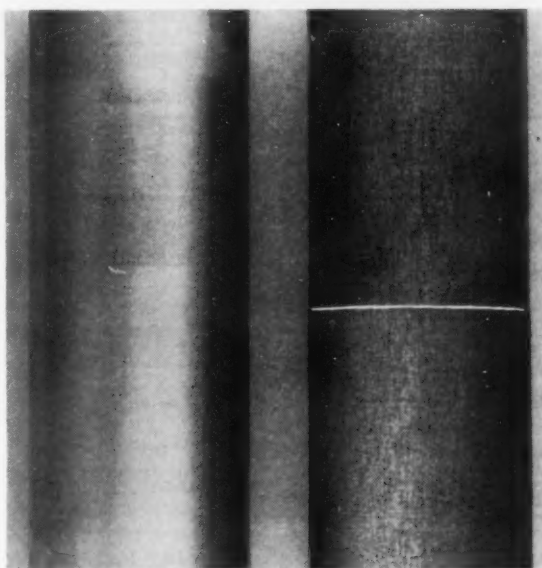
Surface comparison of freshly machined regular 1.00 C tool steel bar, left, and Graph-Mo at the right. The top half of Graph-Mo bar was smooth machined. Regular steel is J.I.C. W-10 a water hardening grade, J.I.C. 0-6 is oil hardening Graph-Mo steel.
